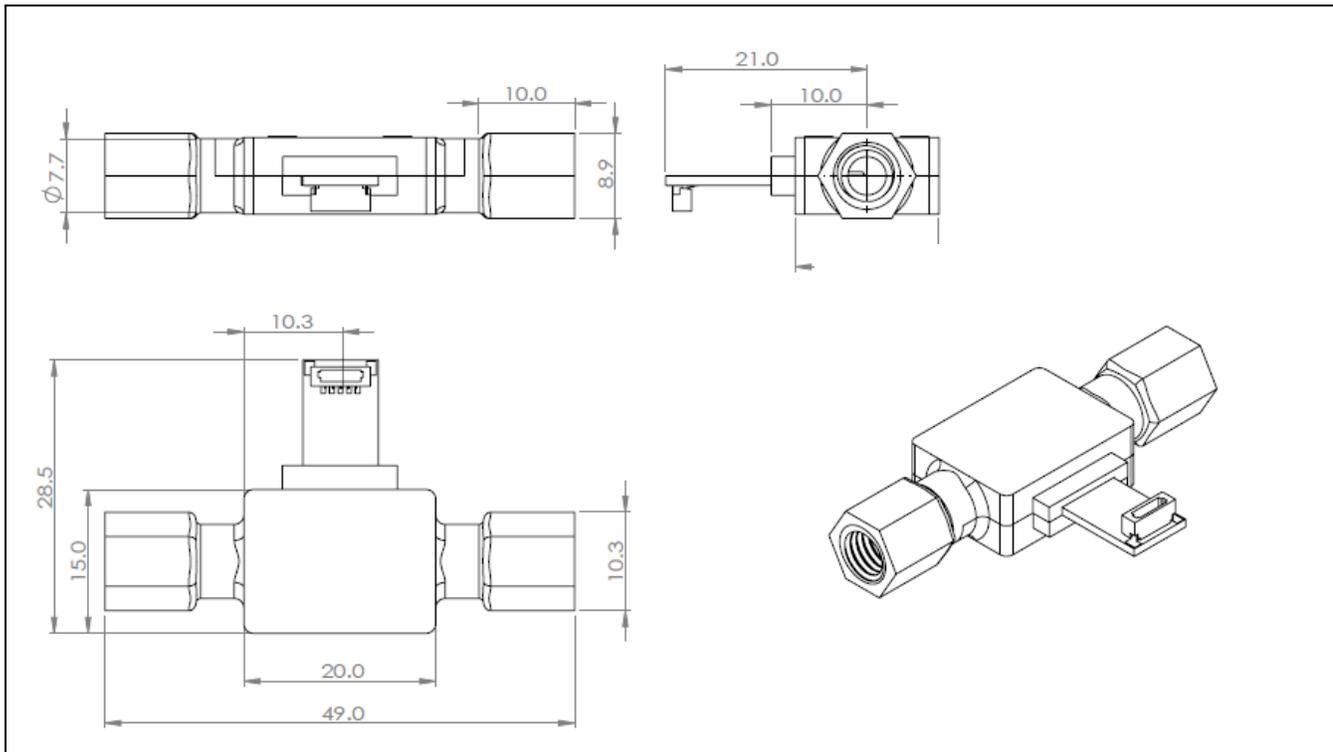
3-view drawing and the dimensions of the sensor component. All dimensions in [mm]
